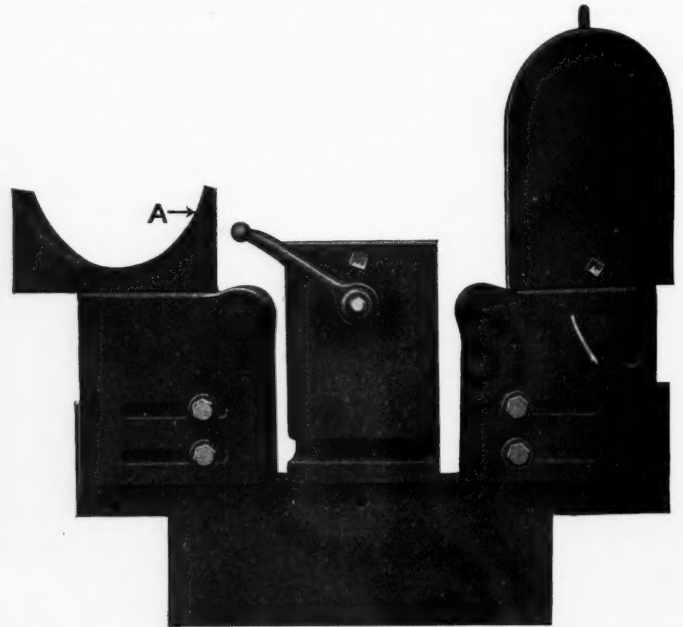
Adjustable Dies for Bending Round and Square End Coupler Pockets.
